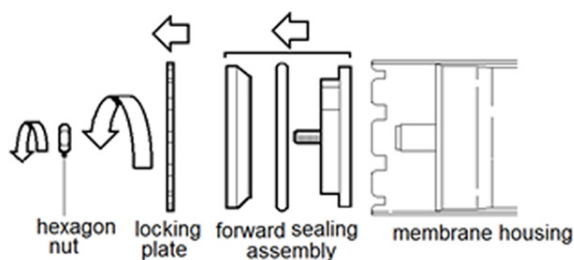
Removal of locking plate and membrane chamber seal assembly
